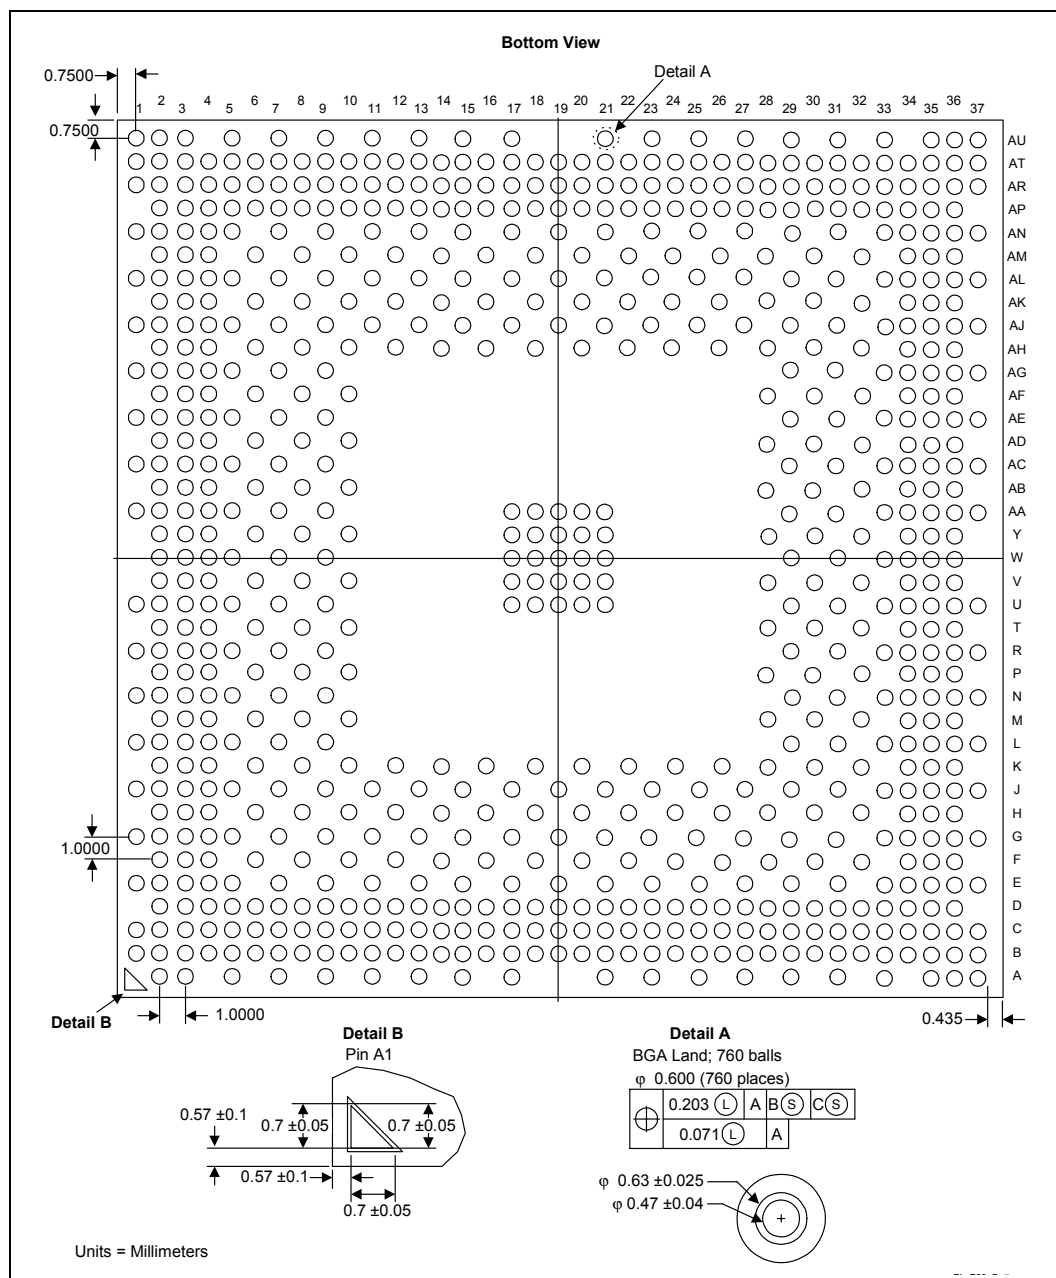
Intel® 82845GE GMCH / 82845PE MCH Package Dimensions (Bottom View)
